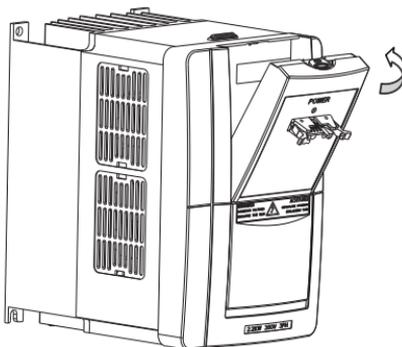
Mounting Demonstration of the operator panel and connecting wire of the inverter Model A
